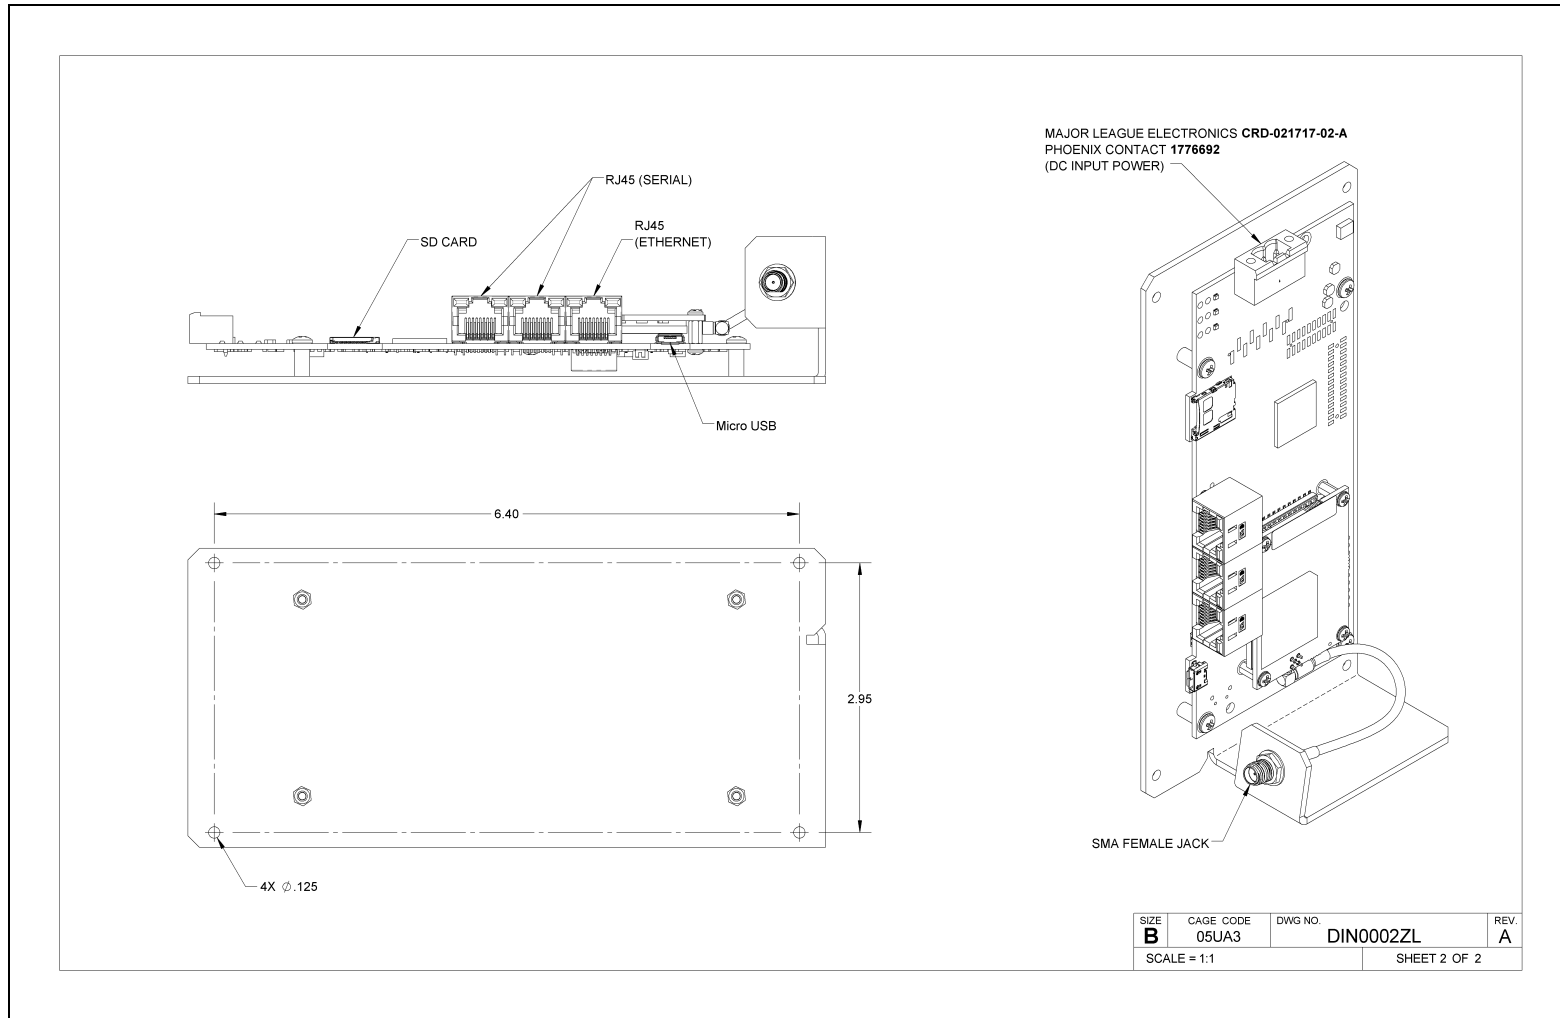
Z9-P Mechanical Drawing - Back and Sides
